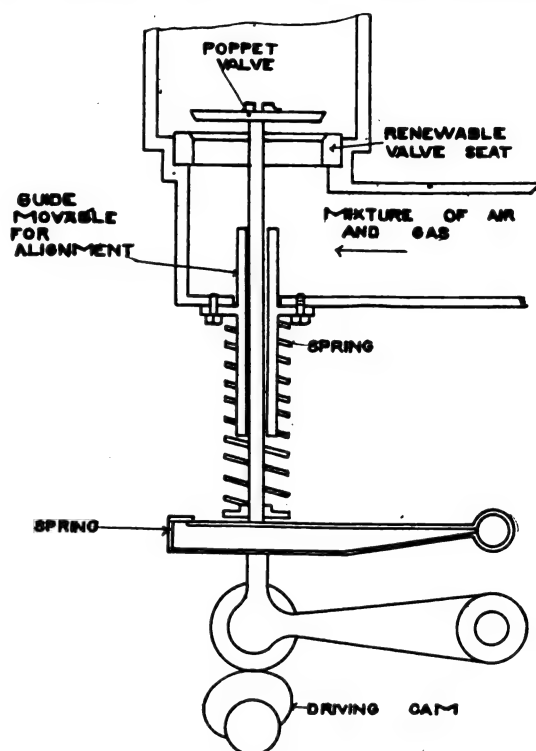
Later Form of Gas Engine Poppet Valve with Renewable Seat.
